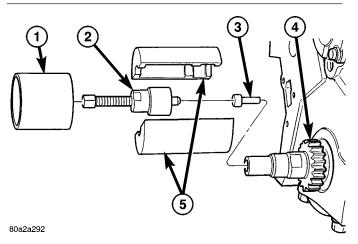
CRANKSHAFT SPROCKET - REMOVAL
